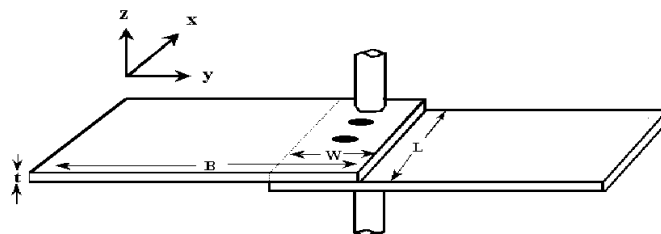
Configuration of spot welded specimen and coordinate
